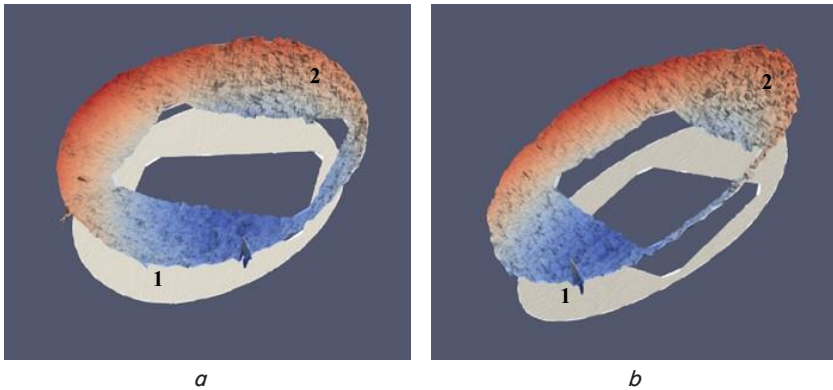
Results of determining the deviations of the position of the welded lids of the cylindrical sample from their original position: *a* – the side welded first; *b* – the side welded by the second; 1 – basic arrangement; 2 – position after welding of the ring seam
